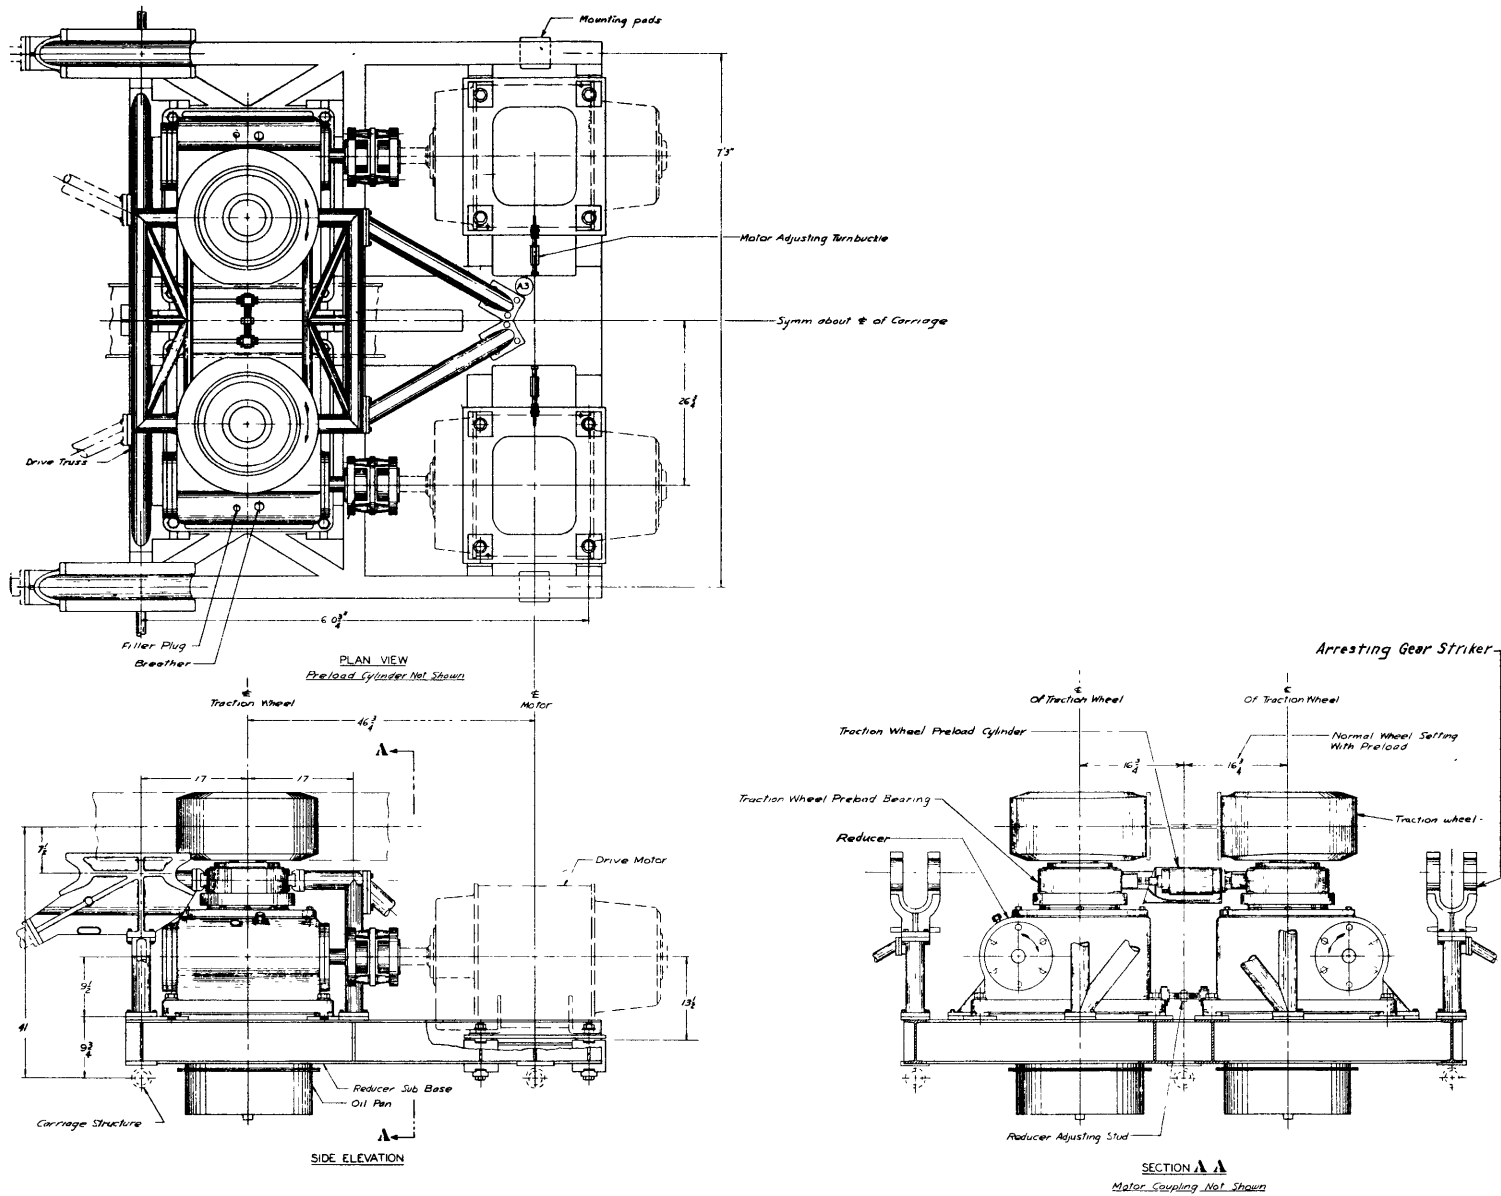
Maneuvering Bridge Carriage Drive Assembly
